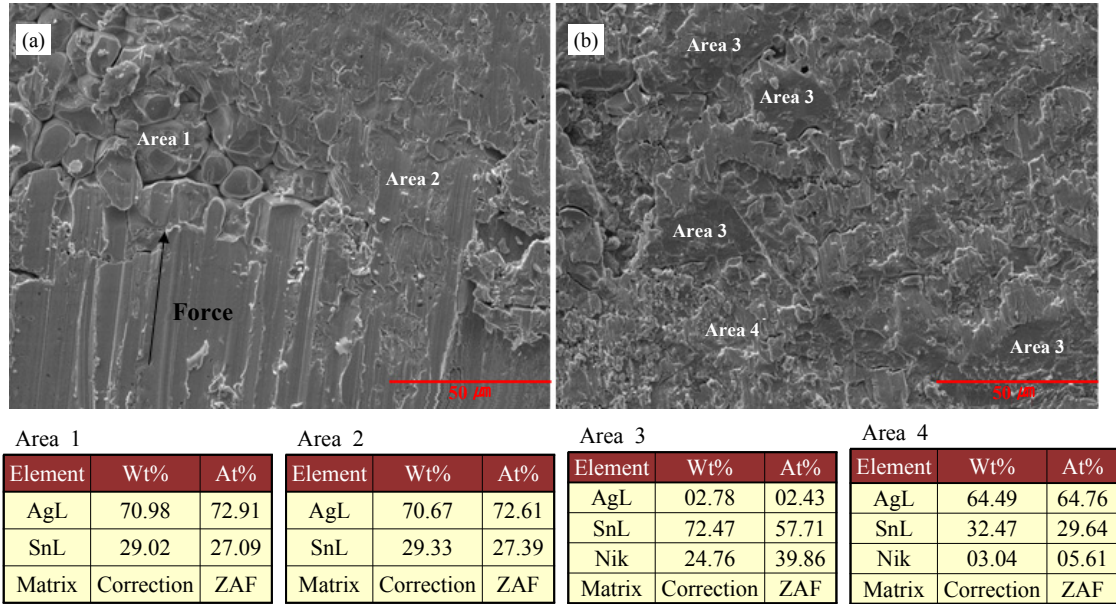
Fracture surfaces after lap-shear test for dissimilar TLPBs: (a) Cu/Sn/Ag and (b) Ni/Sn/Ag
